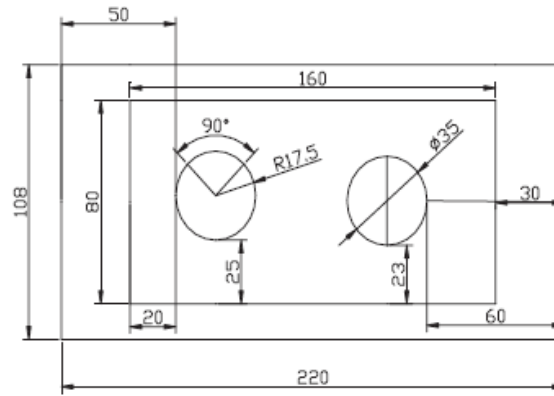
Drawing of rubber and mold (thickness = 33mm, All units are in mm)
